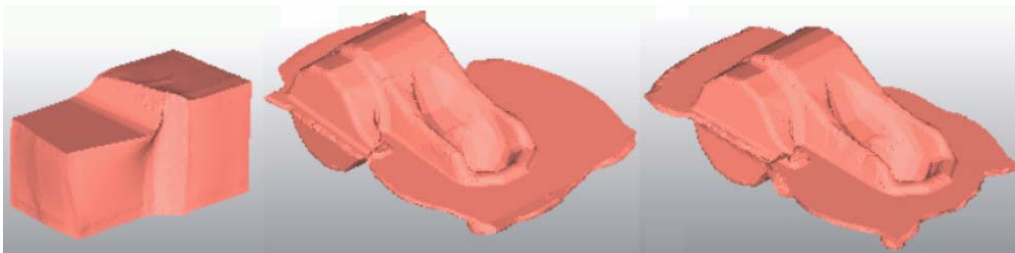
Intermediate shapes of forgings (version II of preform); from left hand side: double fullering, blocker forging, and finisher forging
